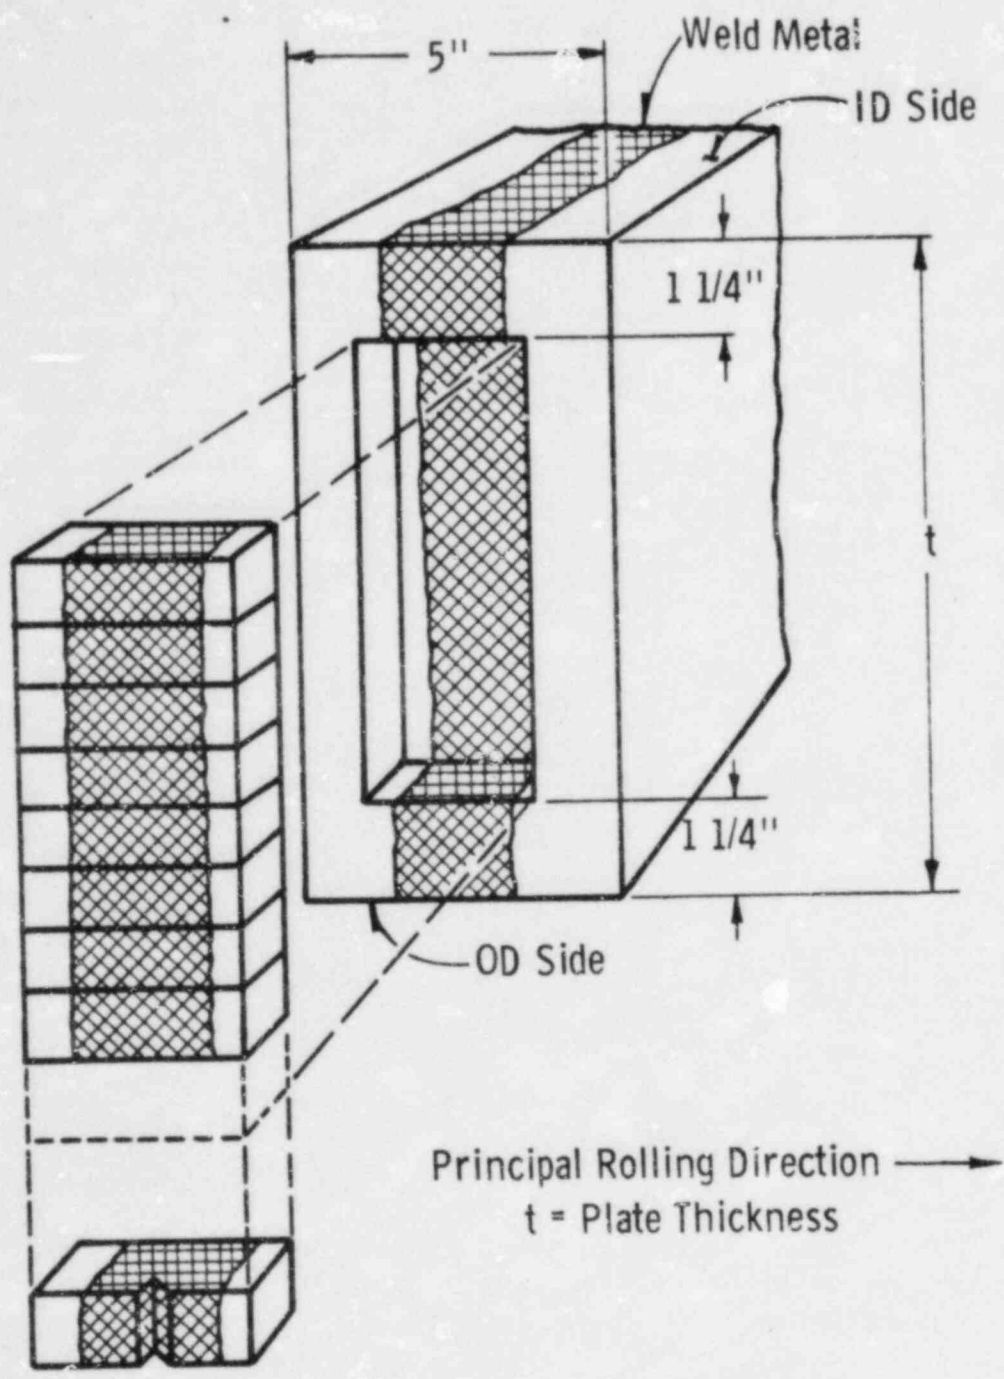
LOCATION OF CHARPY IMPACT SPECIMENS WITH WELD METAL TEST MATERIAL
